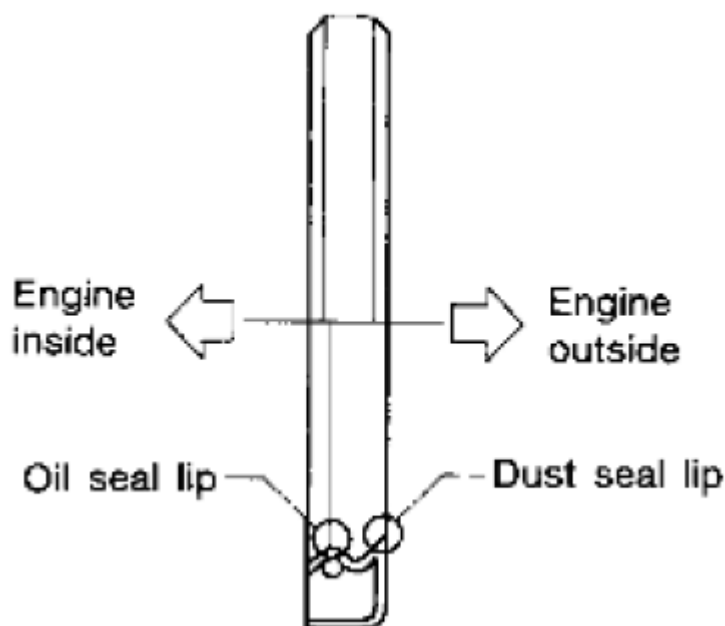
Installing Front Oil Seal On Front Timing Chain Case
